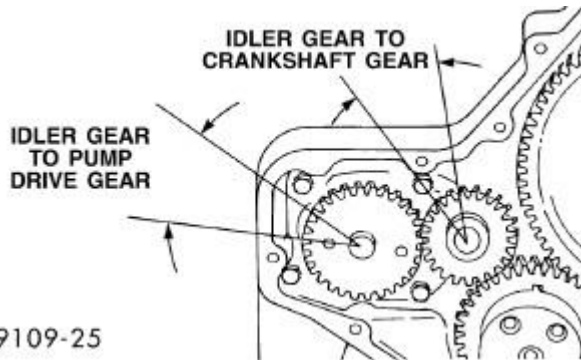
Idler Gear to Pump Drive Gear and Crankshaft Gear Backlash
